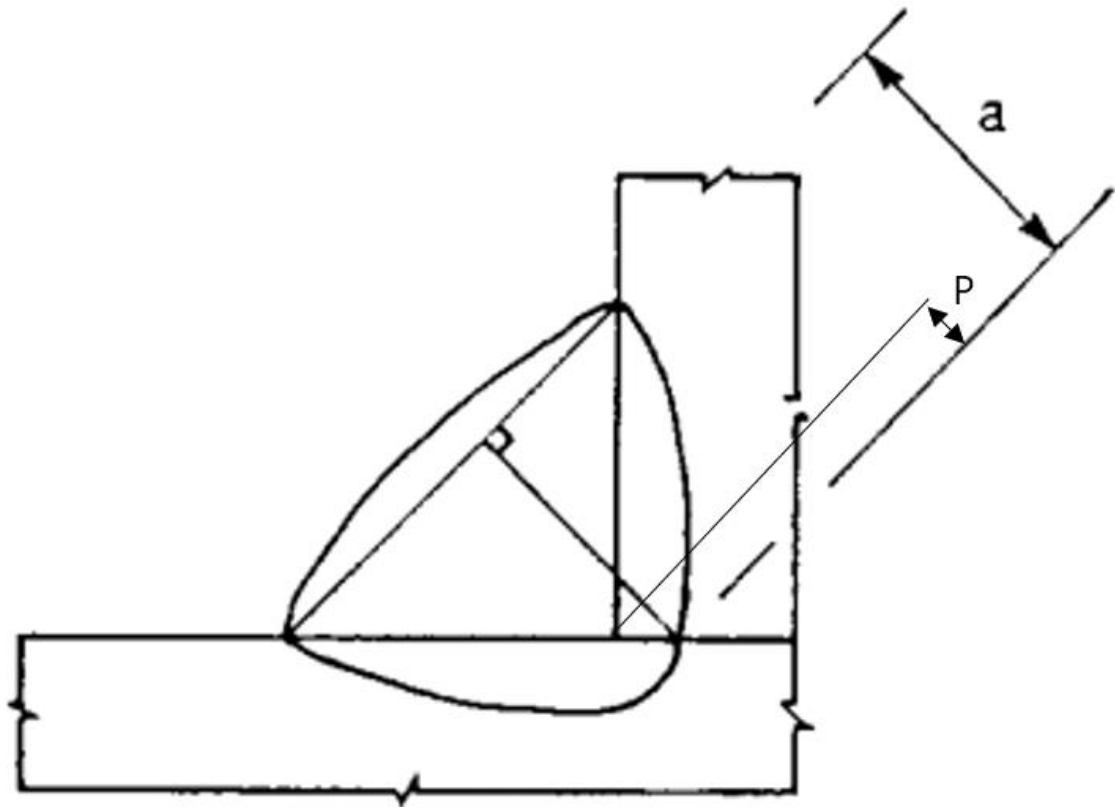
Throat thickness of a deep penetration fillet weld (SFS-EN 1993-1-8 2005, p.42).
